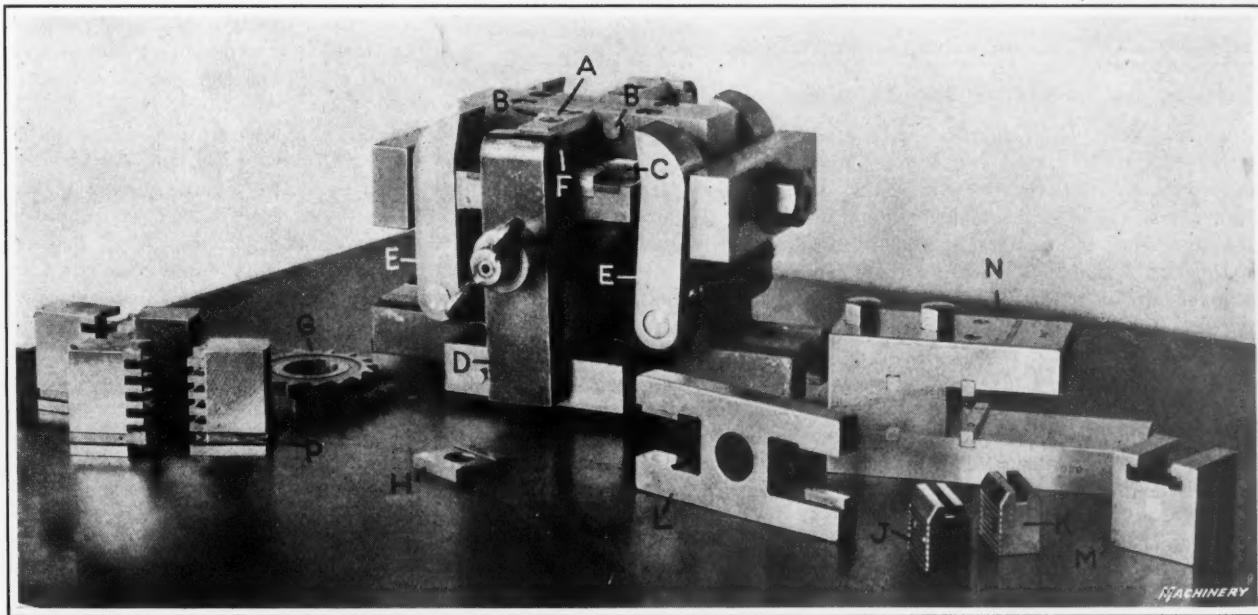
Milling Fixture and Gages used for milling and inspecting the Keyways in the End of the Jaws
